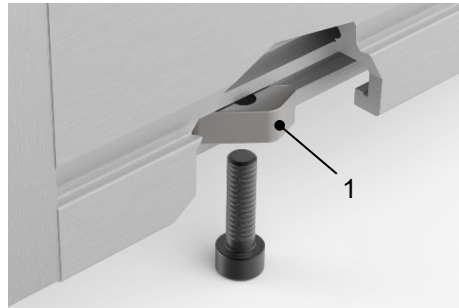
Sliding blocks (1) in the groove on the underside of the basic profile
